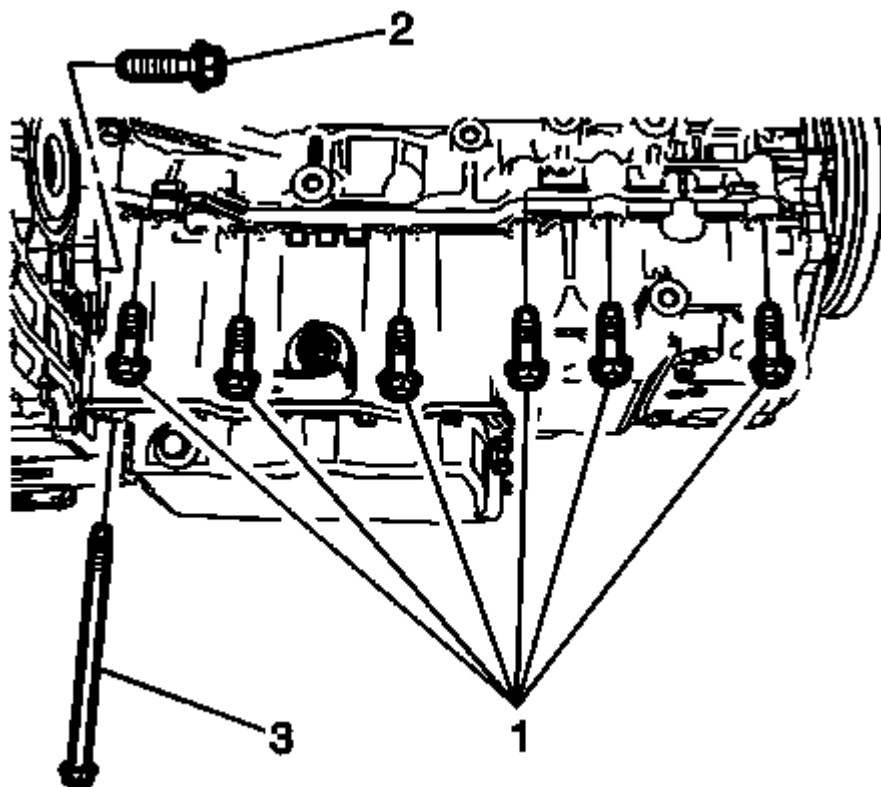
Right Oil Pan to Transmission & Engine Block Fasteners
